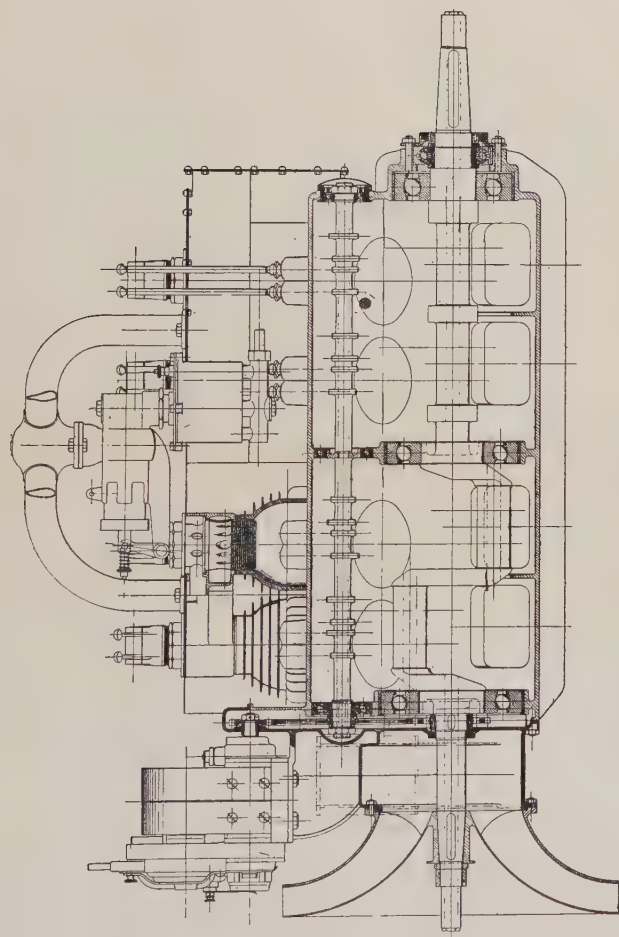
Pipe engine. Longitudinal part. Sectional elevation.
